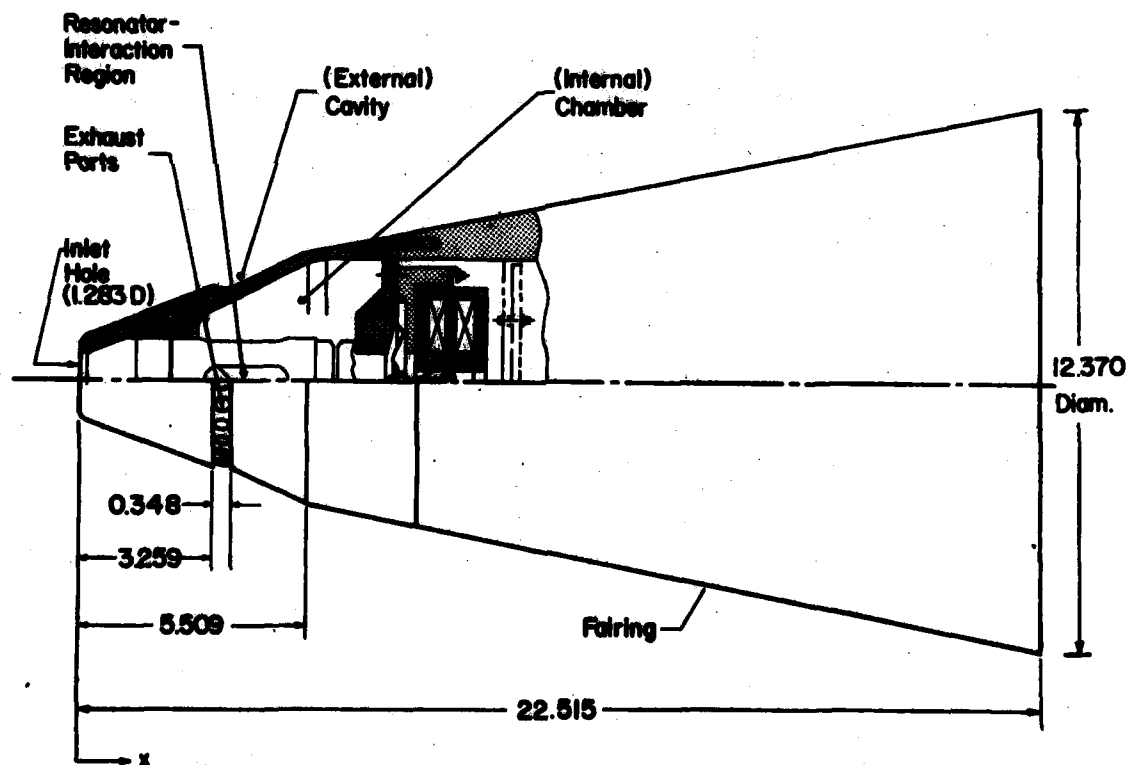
Sketch of the Army/MLRS Fluidic-Generator Fuze-Assembly.
